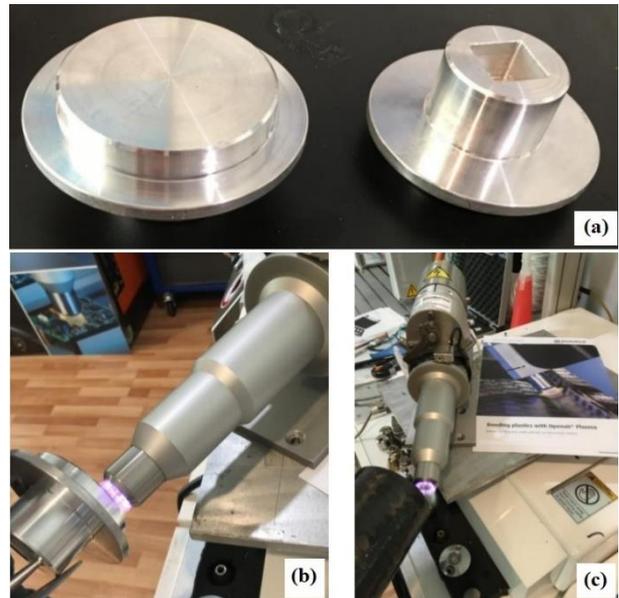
(a) Torsion test fixture apparatuses, (b) plasma application on fixture, (c) plasma application on specimen
